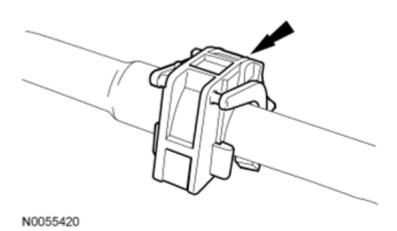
Locating A/C Suction Tube Safety Clip Courtesy of FORD MOTOR CO.
